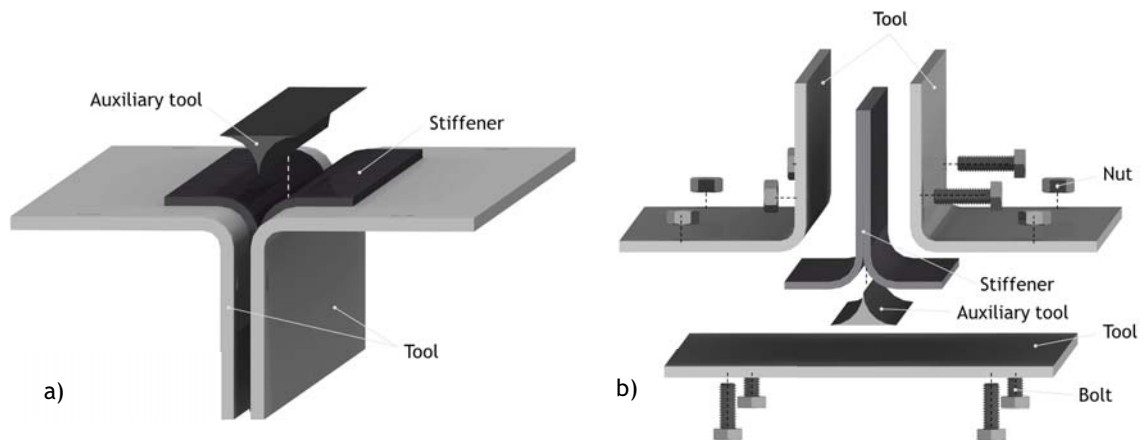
Tooling setup with the auxiliary tool: a) Introduction of the auxiliary tool after layup; b) Complete tooling setup.
